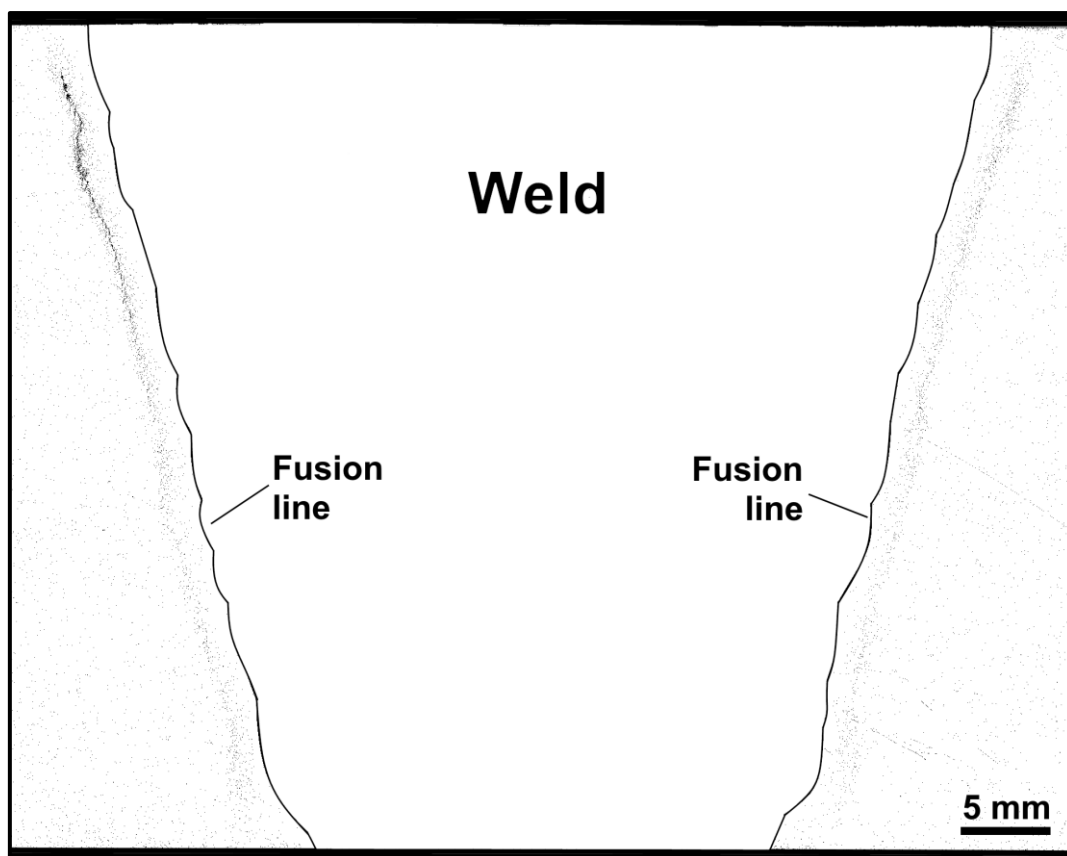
Macro-image of damage in feature-type cross-weld test sample 7C-2
